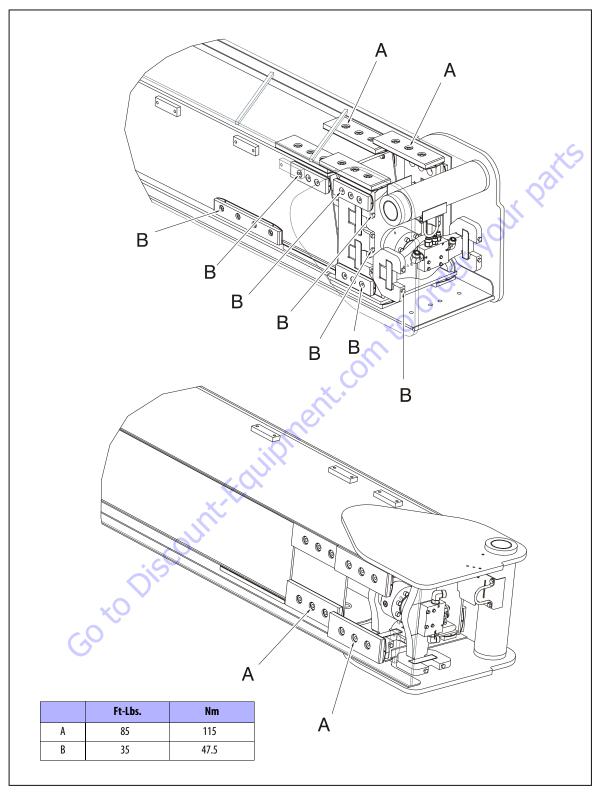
Tower Boom Assembly Torque Values - Sheet 2 of 2
